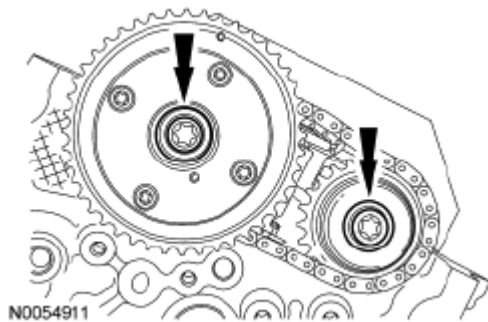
Locating VCT Bolt & Exhaust Camshaft Bolt
